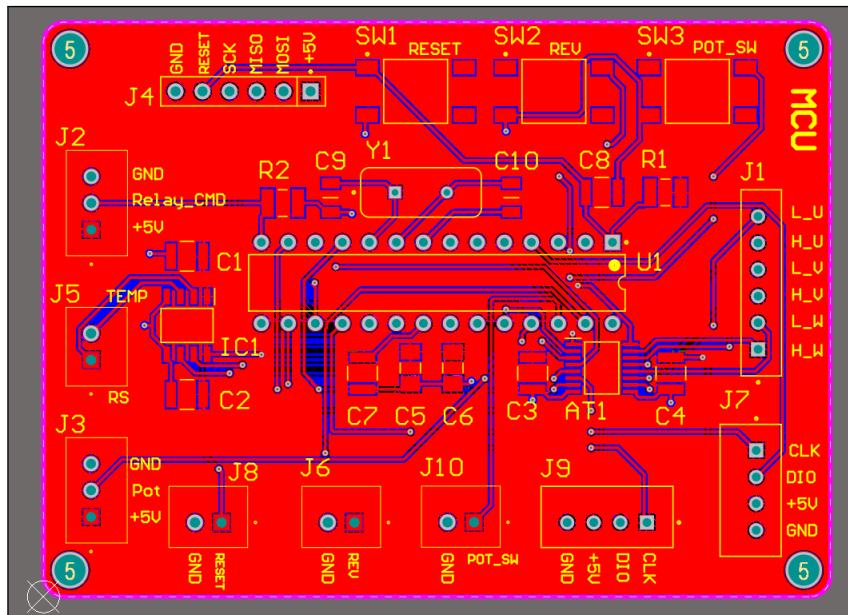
MCU Circuit Top Layer PCB 2D Layout
